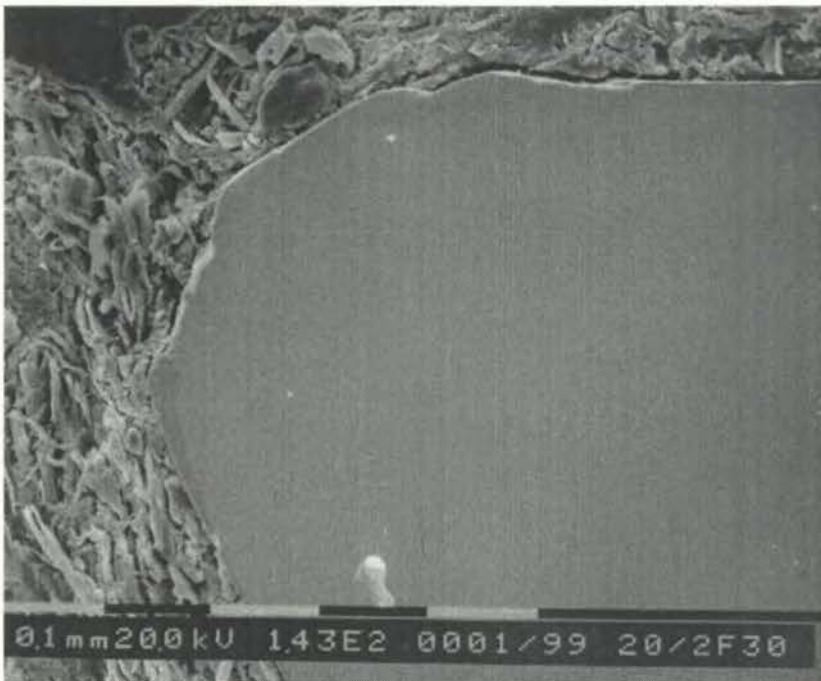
95 Section through failed KC994M tool showing plastic deformation on the rake face and adhered workpiece material on the flank after cutting Waspaloy for 30 seconds at 50 m/min and 0.14 mm/tooth
